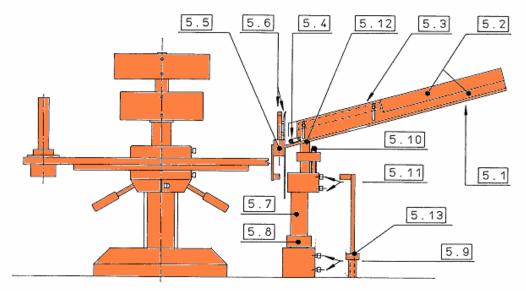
WORK INSTRUCTIONS TO REPLACE TUBE HOLDER
